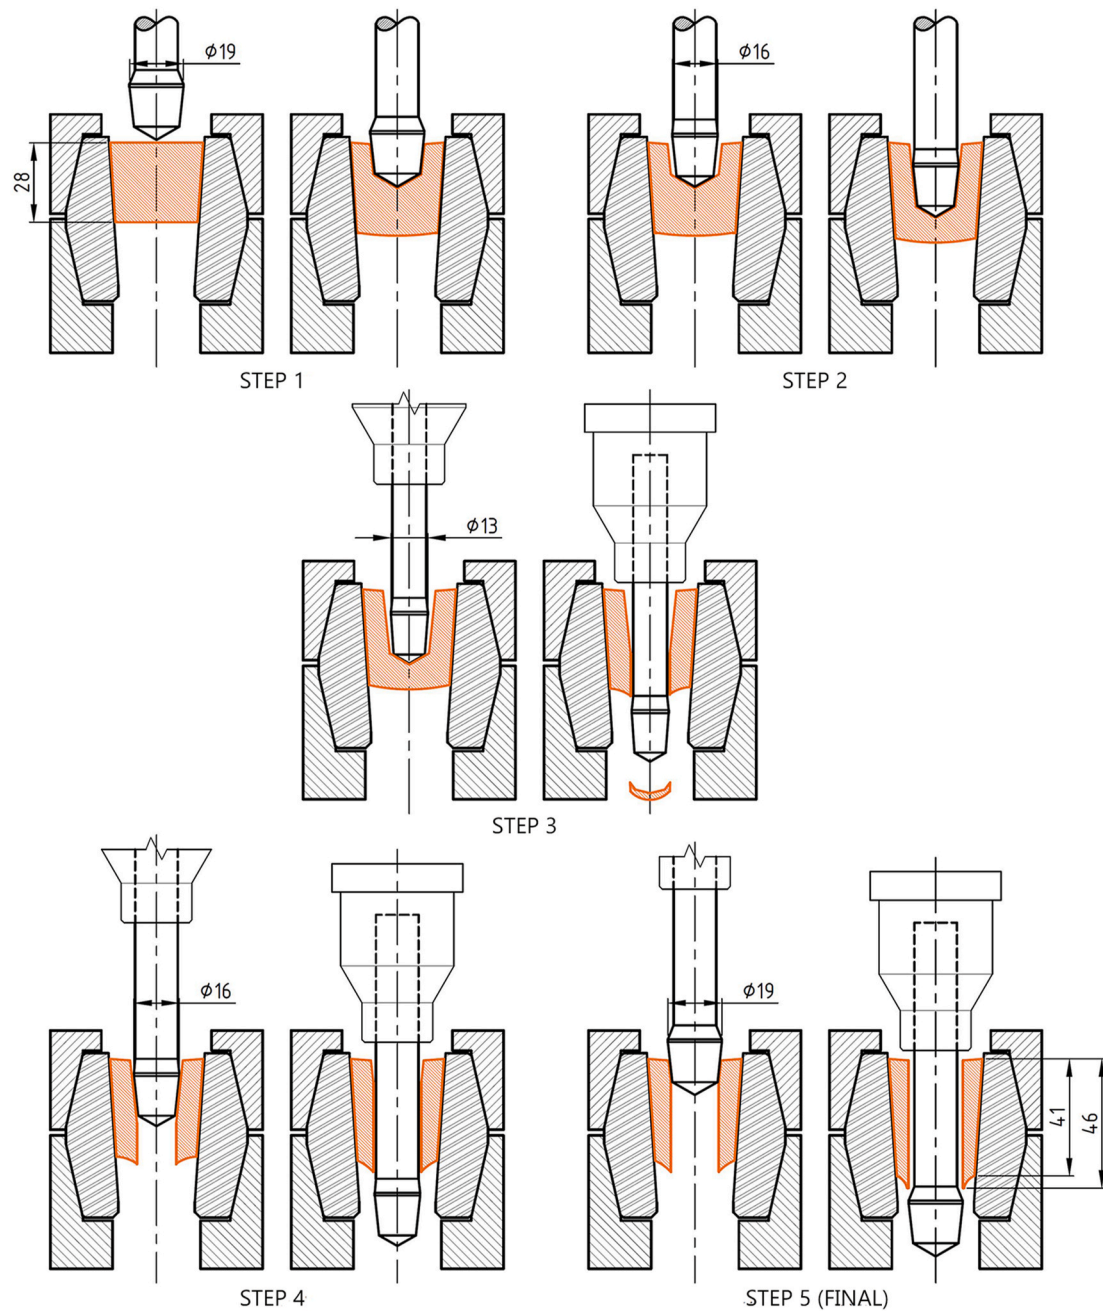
Chart showing the forming steps to manufacture seamless couplings.
